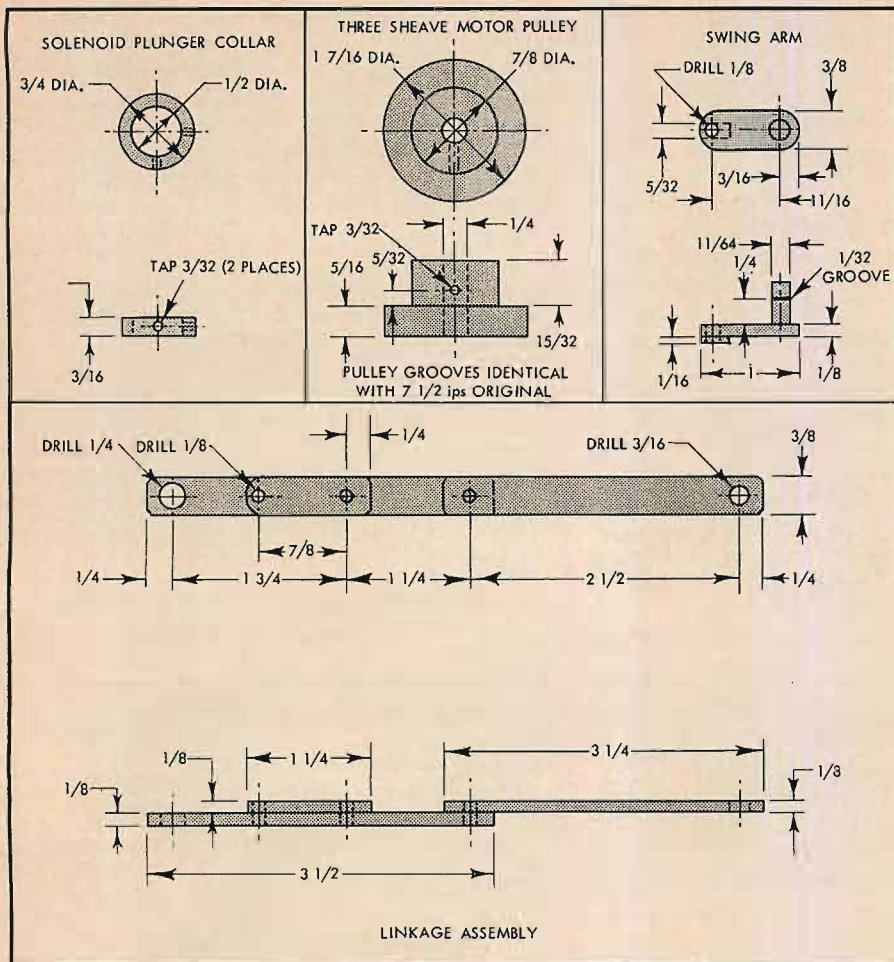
All the measurements for the linkage assembly, swing arm, solenoid plunger depth adjusting collar, and three-sheave motor pulley.
